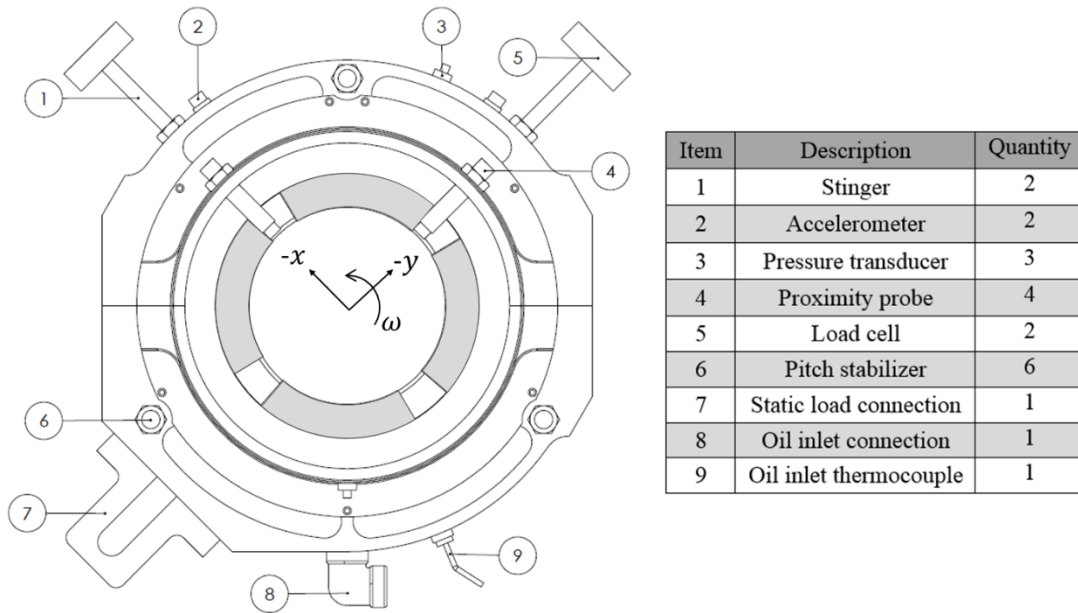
DE view of stator assembly with instrumentation, figure adapted from [20]
